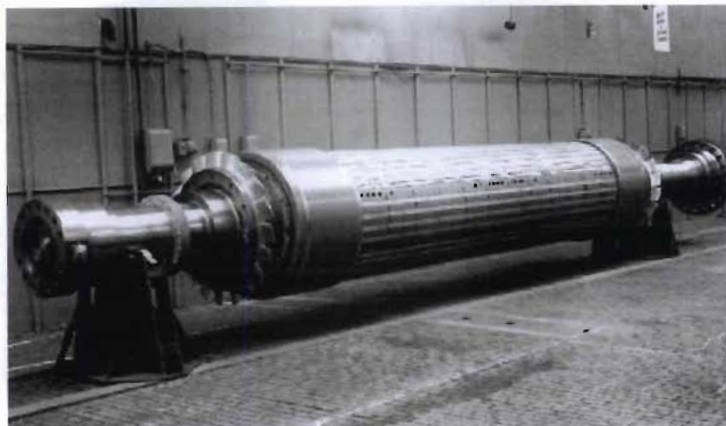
Fully assembled rotor with fans and couplings (Alstom)
